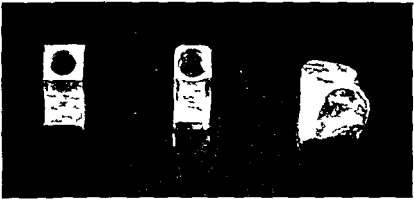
Front view of machined (thoracic) Zimmer No 1251 and molded hooks
